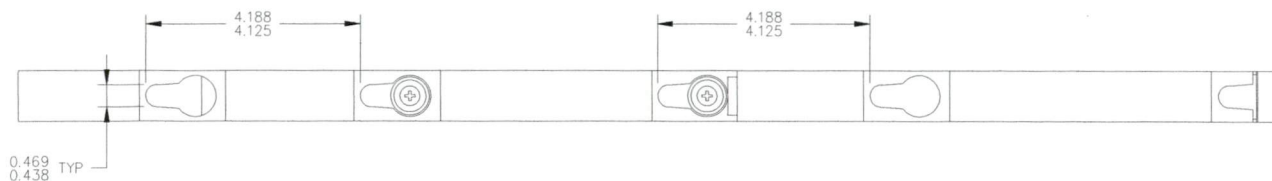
Critical Keyway Dimensions (Forward Beam)
